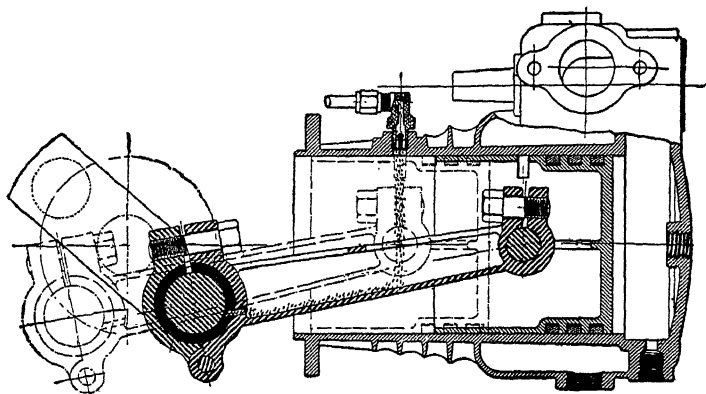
HORIZONTAL CYLINDER OILED BY FORCE-FEED OIL DISTRIBUTER. The piston is oiled when passing under oil port, as shown by the dotted outline. The connecting rod is longitudinally grooved on the upper surface, so as to carry oil to the bearings.
